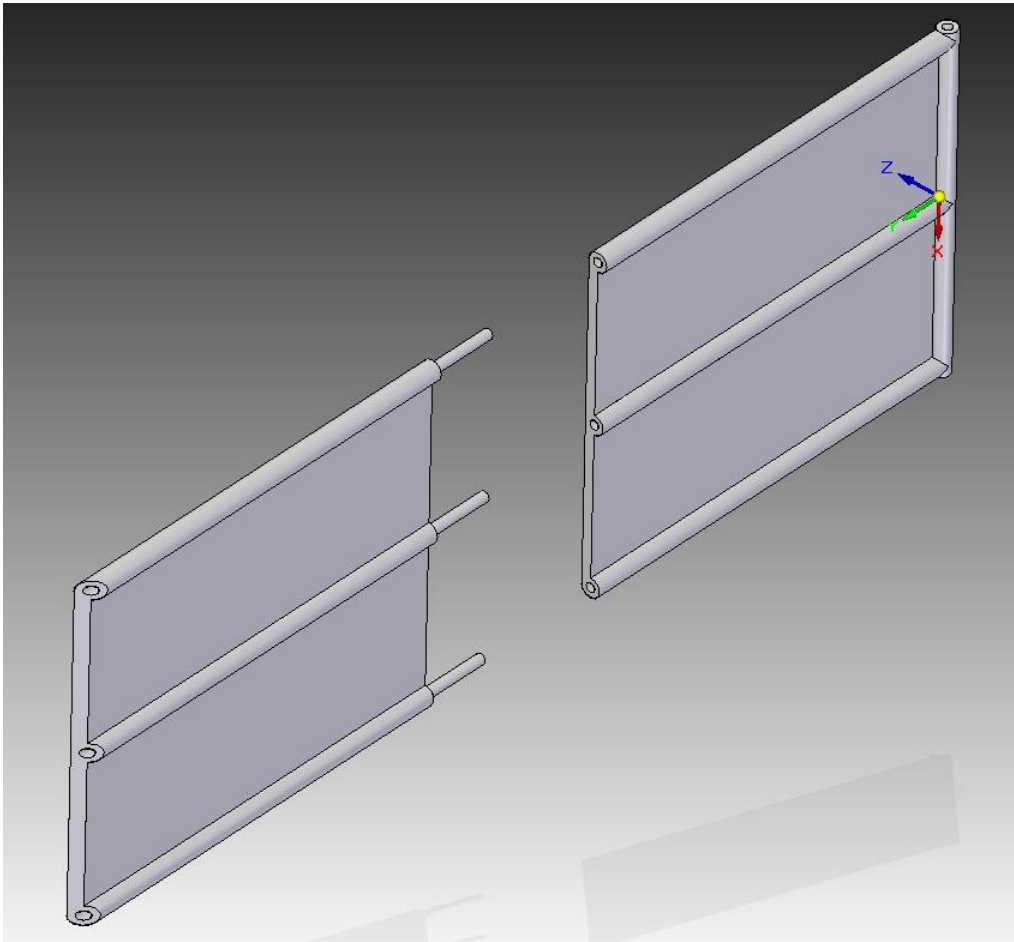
Design 3 a sheet divided into two parts with the help of joints.
